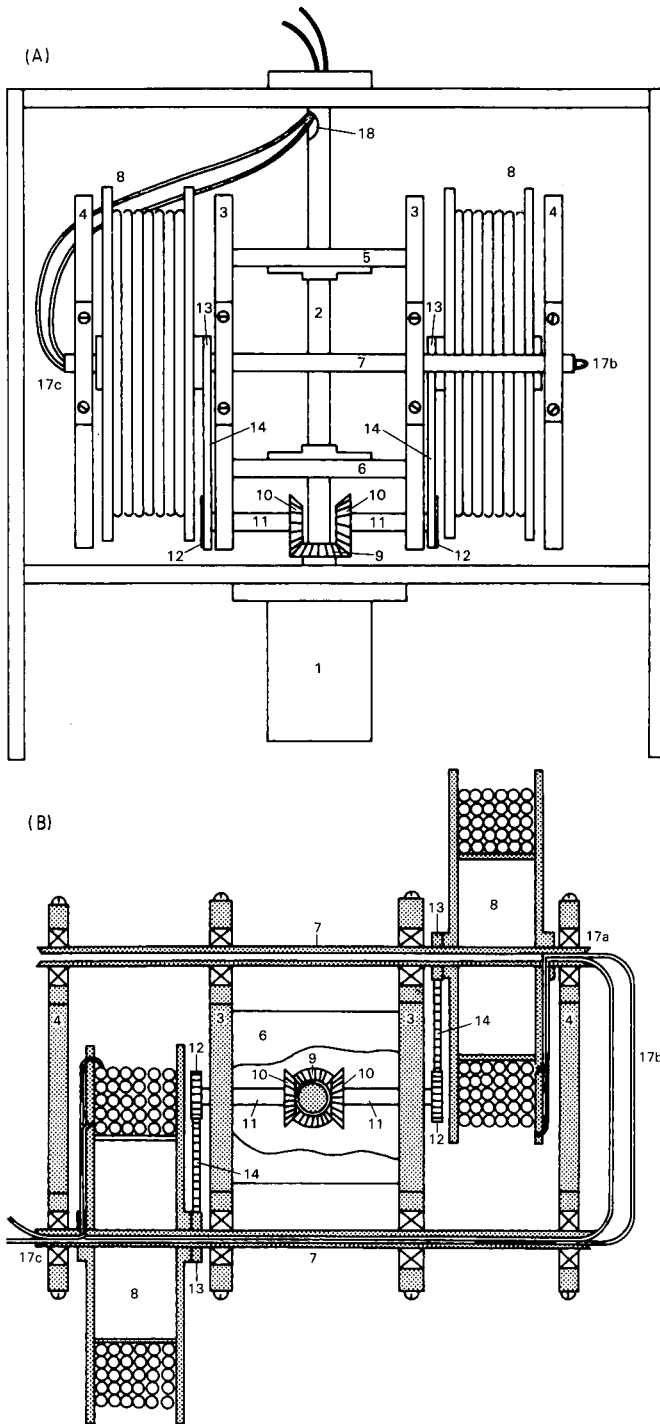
The design of the present cross-axis synchronous flow-through coil planet centrifuge. (A) Side view of the apparatus. (B) Cross sectional view through the holder axis in the horizontal plane: 1 = motor; 2 = central shaft; 3 = inner side-plate; 4 = outer side-plate; 5 = upper plate; 6 = lower plate; 7 = coil holder shaft; 8 = coil holder; 9 = stationary miter gear; 10 = planetary miter gear; 11 = countershaft; 12 and 13 = toothed pulleys; 14 = toothed belt; 17a-c = flow tubes; 18 = side hole of the central shaft.
